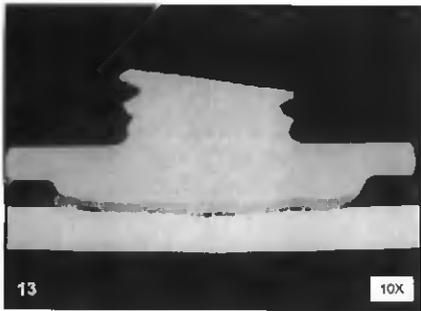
Macrograph of stud weld, Zn-coated stud, stud negative, used collet, TMP power, large flange stud, 1.4-mm EG sheet with light oil coating.
